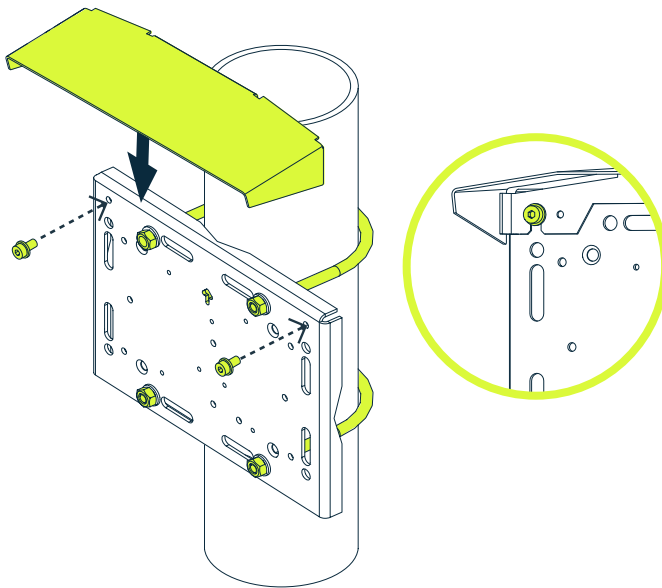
Attaching weather shield to mounting plate - vertical pole mounting
